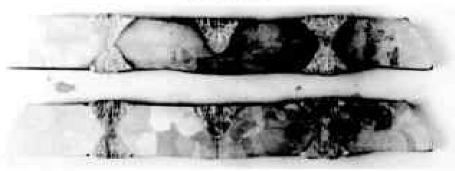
Typical Macro Etch Specimens from Restrained Butt-Joint Weld Tests Showing Size and Shape of Weld Deposits.
